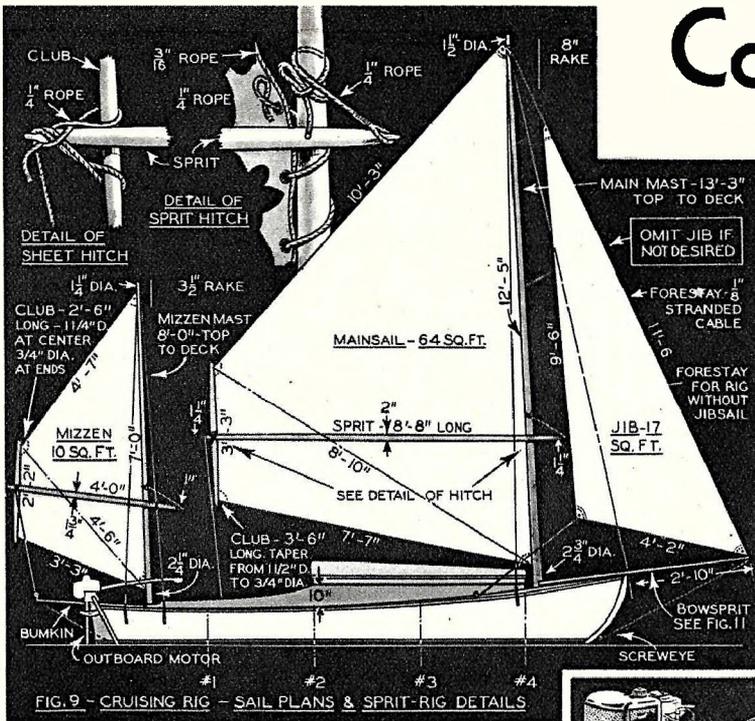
CRUISING RIG - SAIL PLANS & SPRIT-RIG DETAILS
